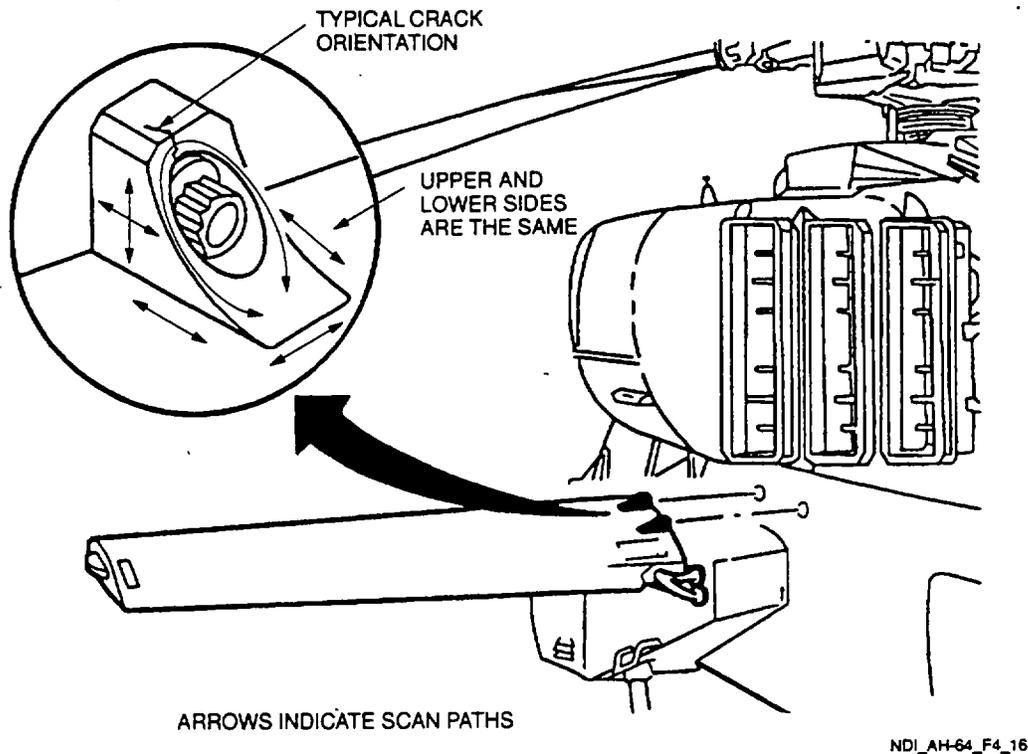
Wing Attachment fittings on Wing and Fuselage
